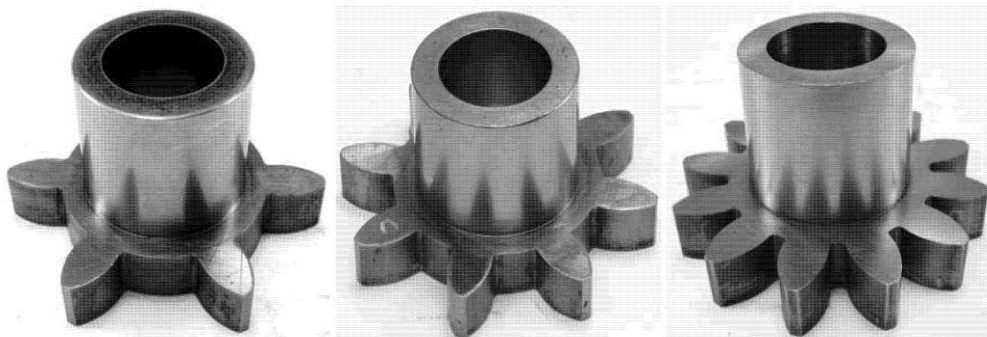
6-, 8-, 12-tooth gears backward extrusions dies
